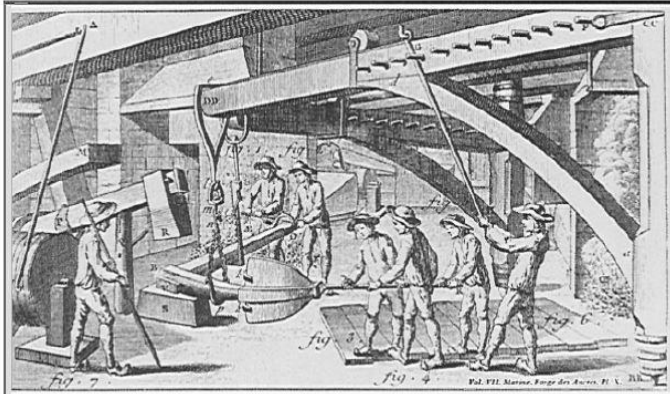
Woodcut showing a large ship's anchor being forged in 18th century France. The arm and the shaft of the anchor are being forge-welded together in this view.
